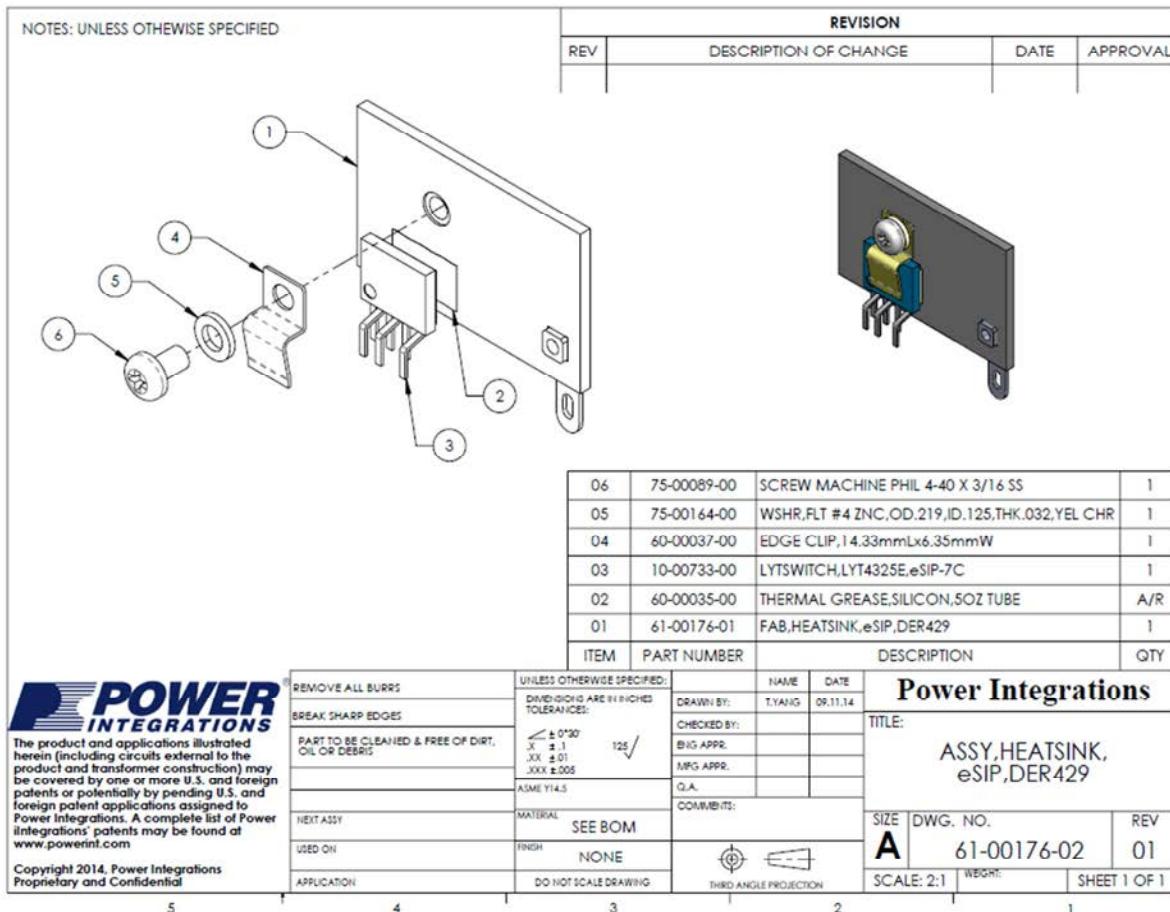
eSIP and Heat Sink Assembly Drawing.
